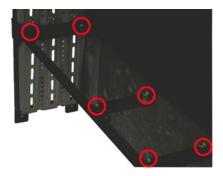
Two Copper Pillars and Four Predrilled Elevated Retention Screw Holes
